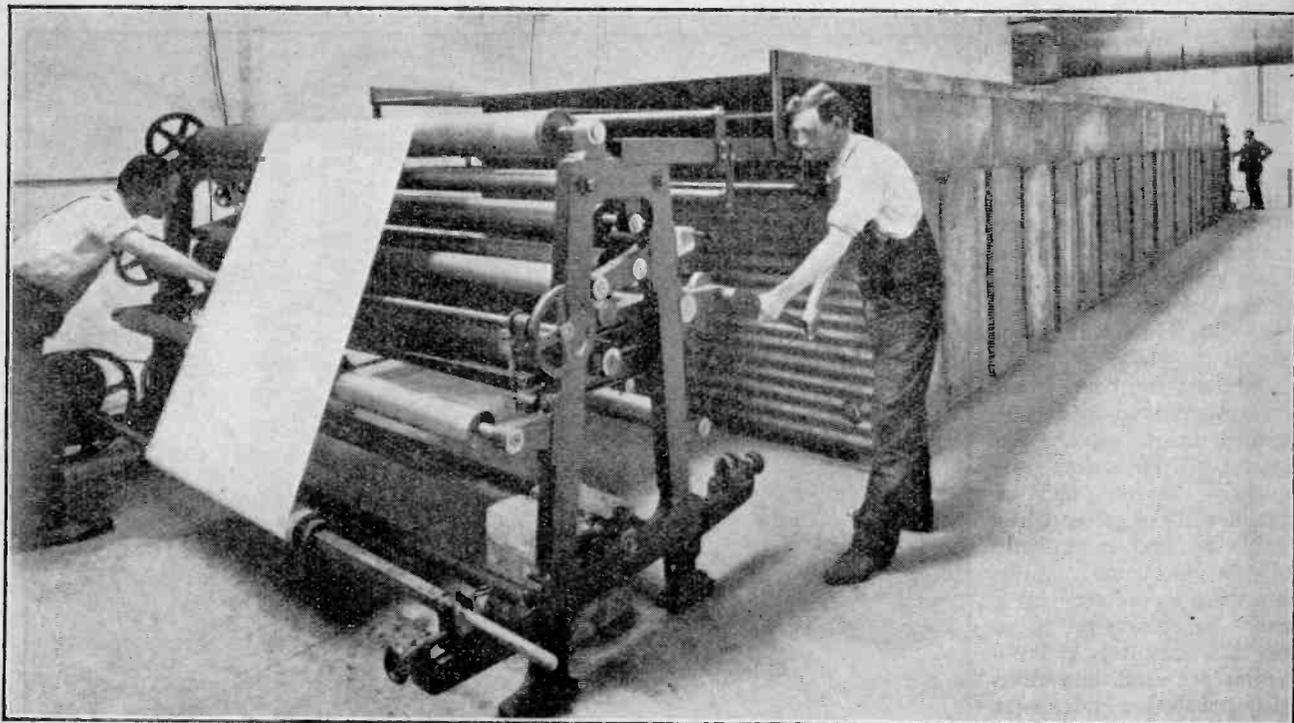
Paxolin paper varnishing machine equipped with steam-heated oven 75ft. long.
